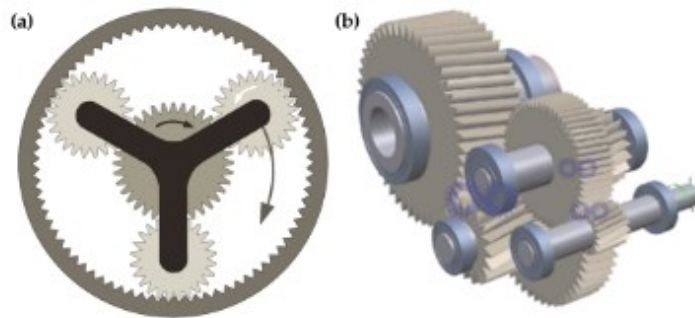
Schematic of (a) a planetary gear set and (b) a multi-stage gear set
